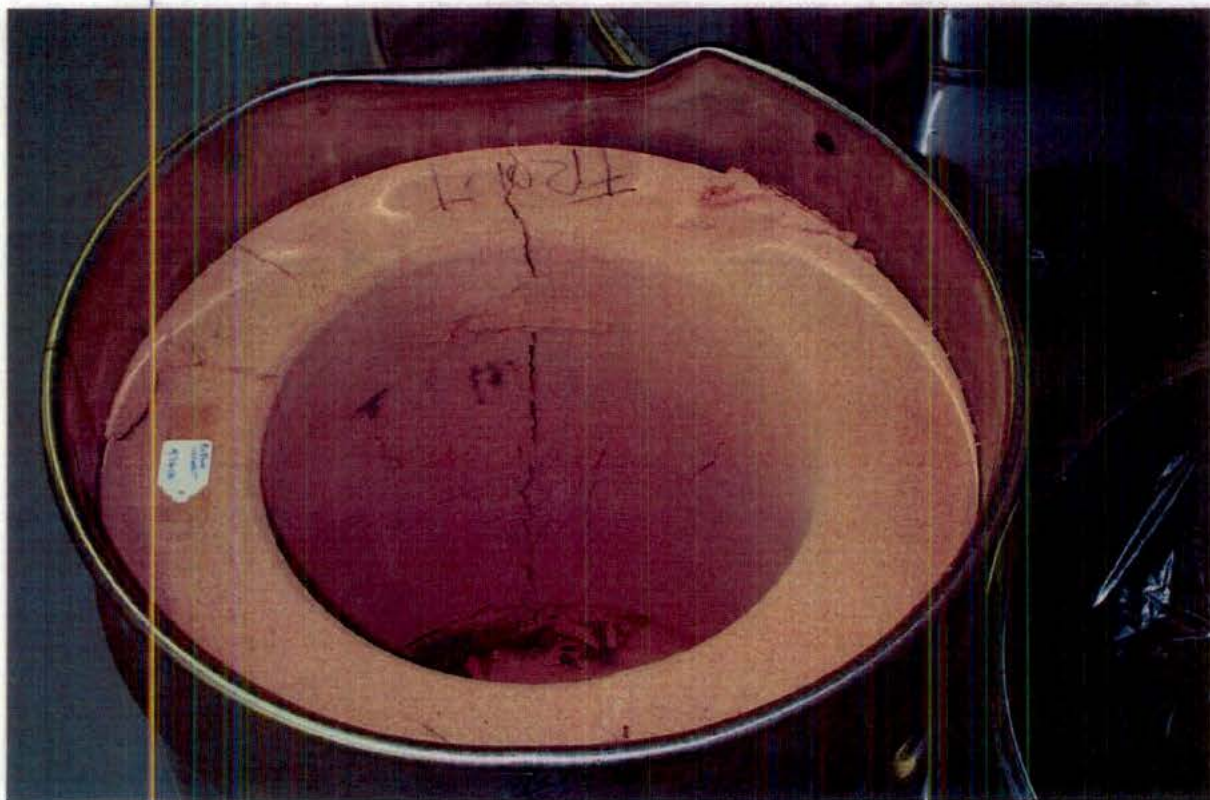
SIDE CORK DAMAGE: SPECIMEN TP163 (B)
